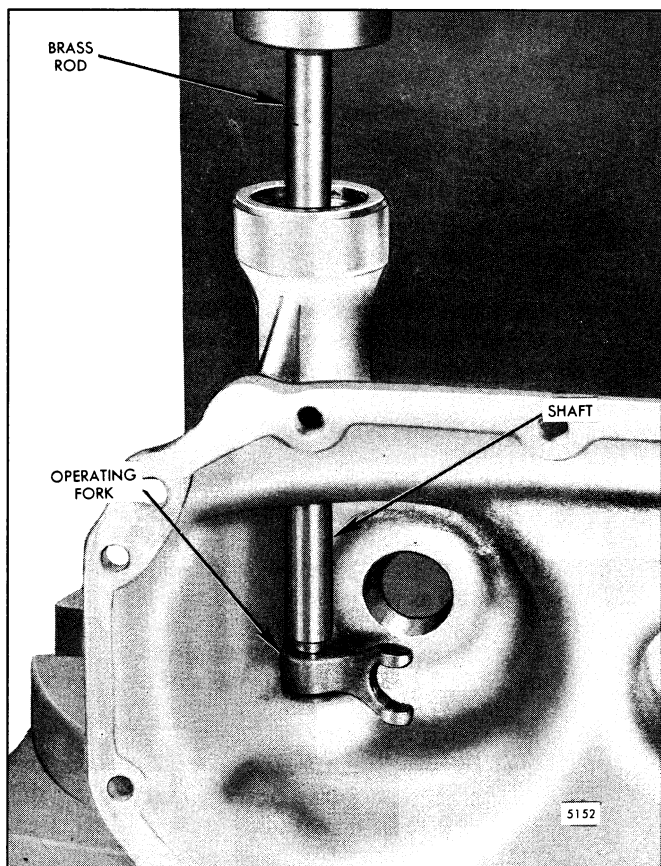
Installing Operating Fork and Shaft in Weight Housing
